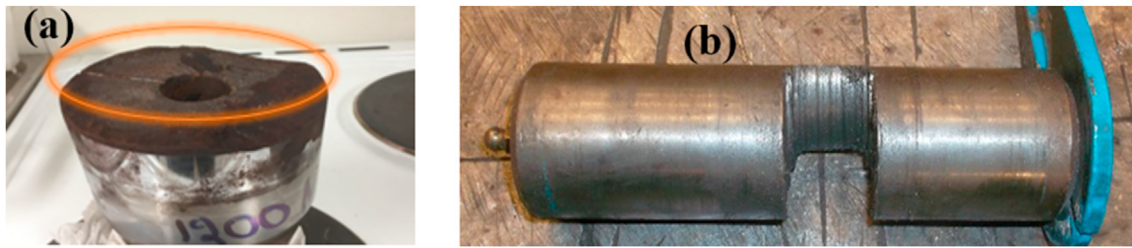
Std cylindrical pins - (a) breakage of pin, (b) wear damaged pin.
